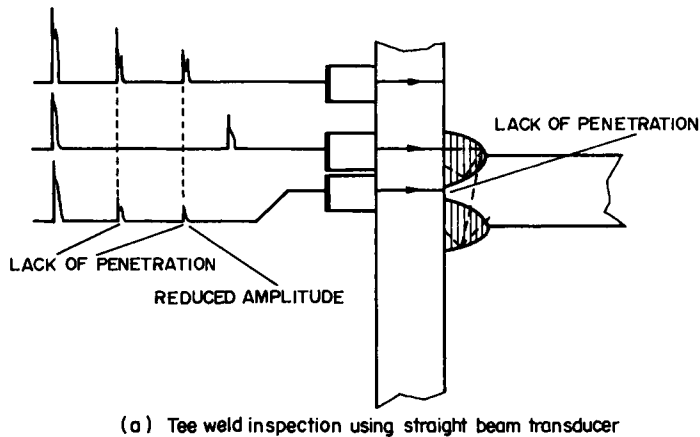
Ultrasonic inspection of welds.
